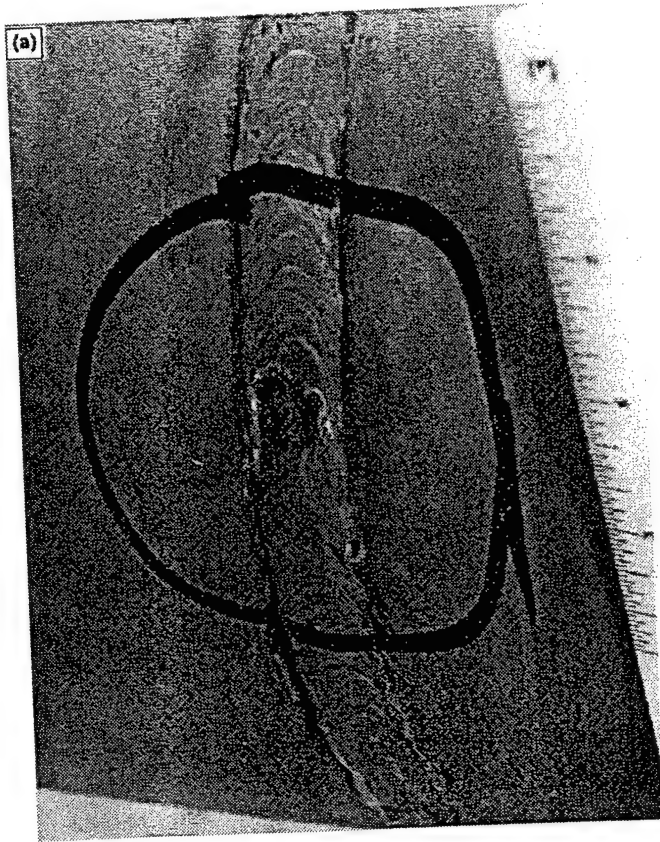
(a) - Weeper at 308L weld on outside diameter of 316L pipe.¹⁰
